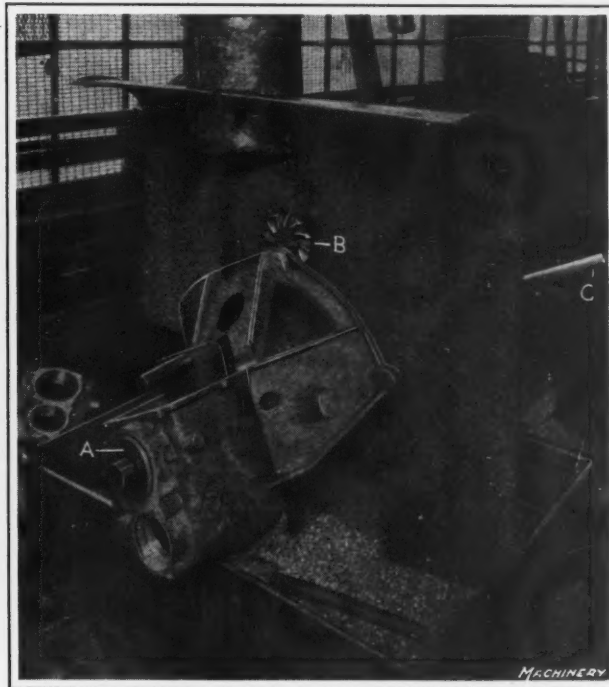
Special Rotary-feed Milling Machine designed and built for Use in facing the Flange of Essex Transmission Cases
